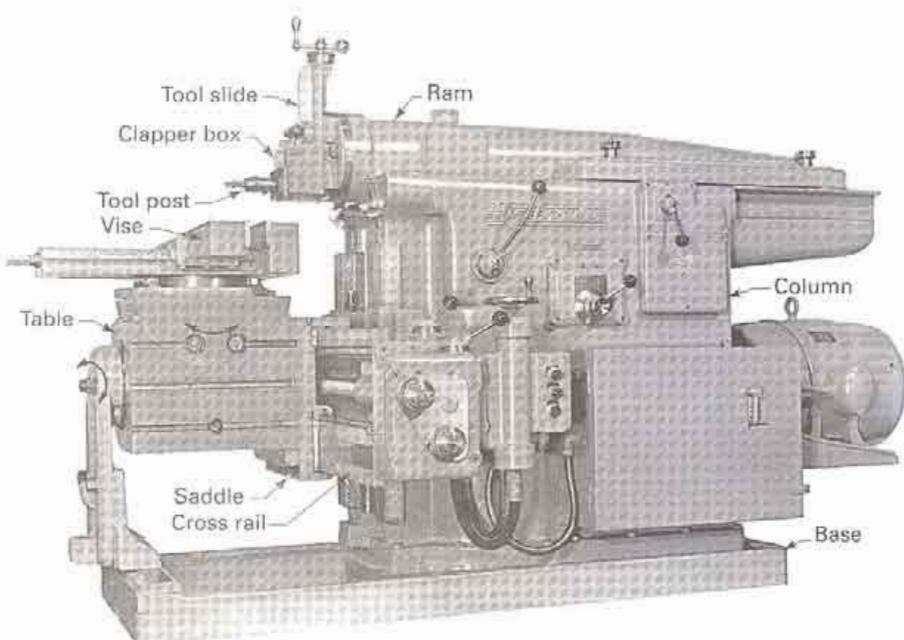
The most widely used shaper is the horizontal push-cut machine tool, shown here with no tool in the tool post.
